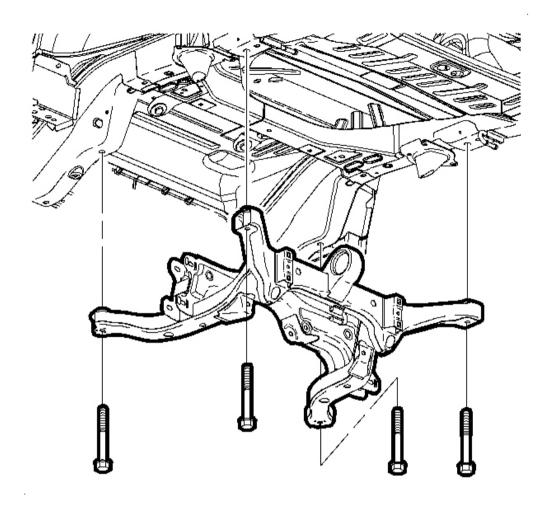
Body Bolts & Support Assembly Courtesy of GENERAL MOTORS CORP.
